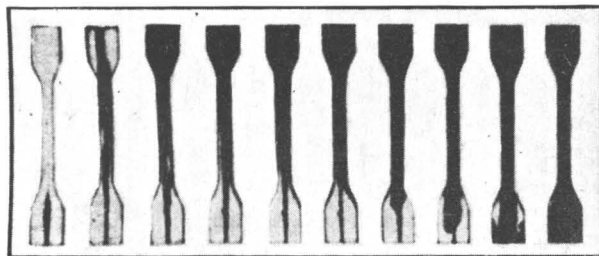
Filling of a test-bar mould. Reading from left to right, the illustration at the extreme left shows the mould 4×10^{-3} secs. after pouring had commenced. The succeeding illustrations show the appearance of the mould at intervals of 12×10^{-3} , 20×10^{-3} , 34×10^{-3} , 43×10^{-3} , 57×10^{-3} , 62×10^{-3} , 67×10^{-3} , 74×10^{-3} , and 82×10^{-3} secs., the last representing the mould in its completely filled state.
